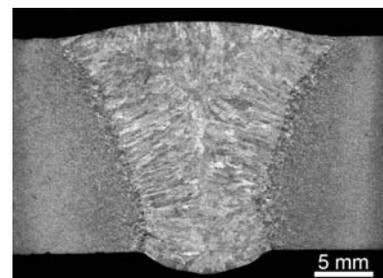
Typical macrostructure of EGW weld joint by SEGARC process
